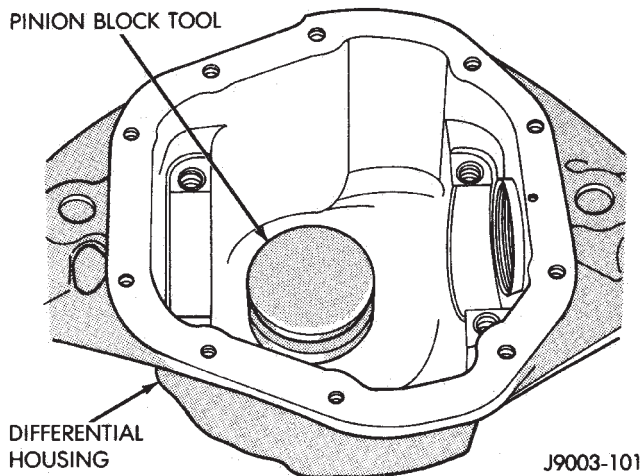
Pinion Block Tool Inserted In Shaft Bore
